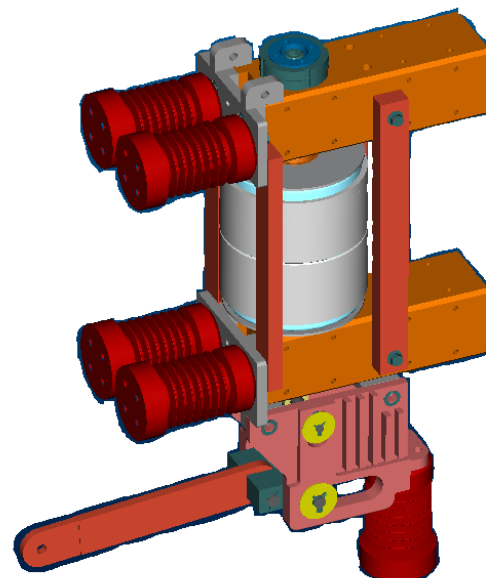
Typical Fixed Breaker Pole Unit Assembly
